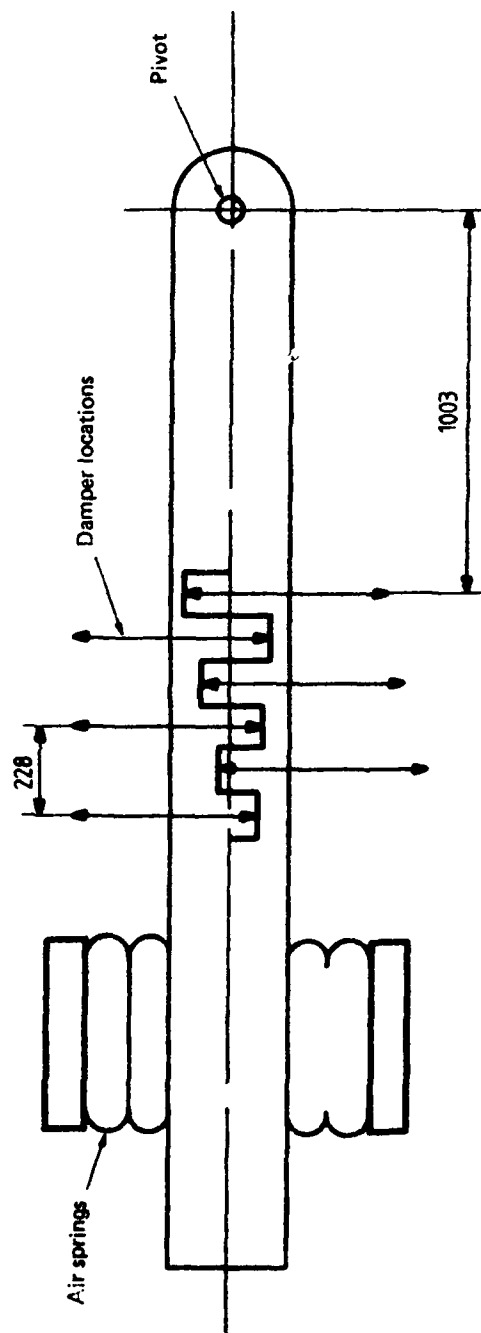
ORIGINAL INSTALLATION ON H.M.A.S. BALIKPAPAN (INSTALLED WITH LOWER THREE DAMPERS ON EACH SIDE INVERTED)
